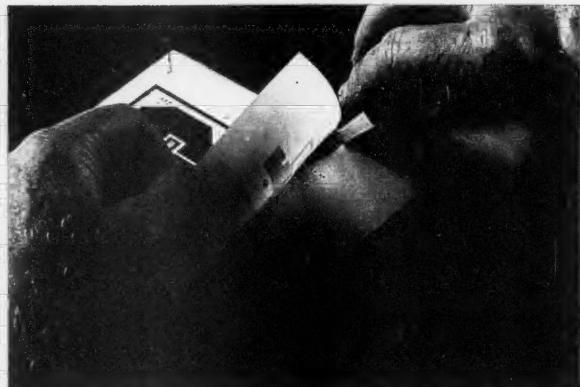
Photo H. The first half of the paper mask has been aligned and cemented, while the second half is being cemented.
